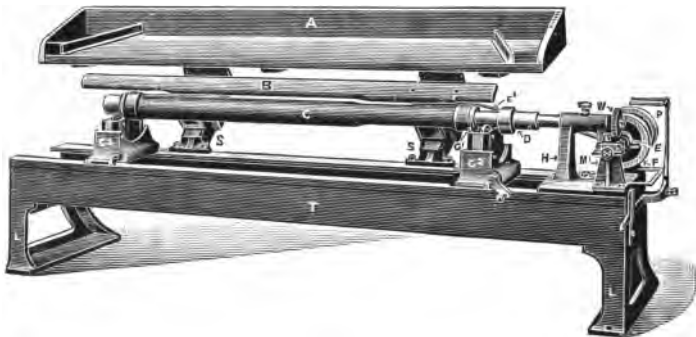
W. Jones' Pipe Core Moulding Machine.
